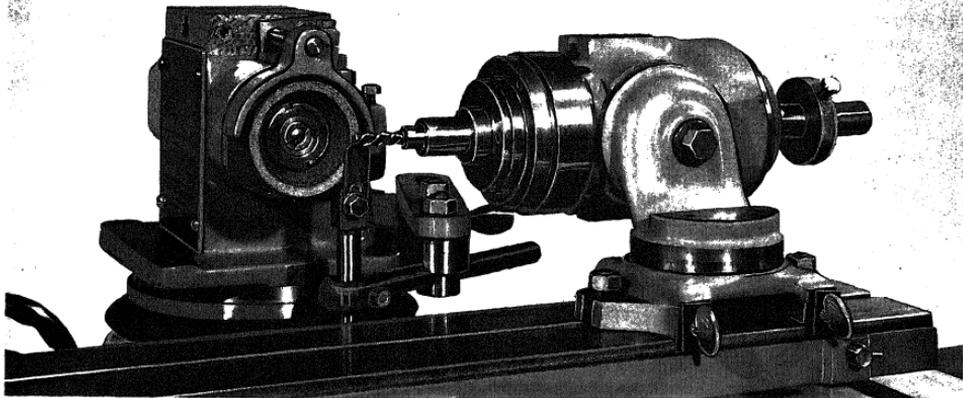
Grinding the peripheral teeth of an end mill.
